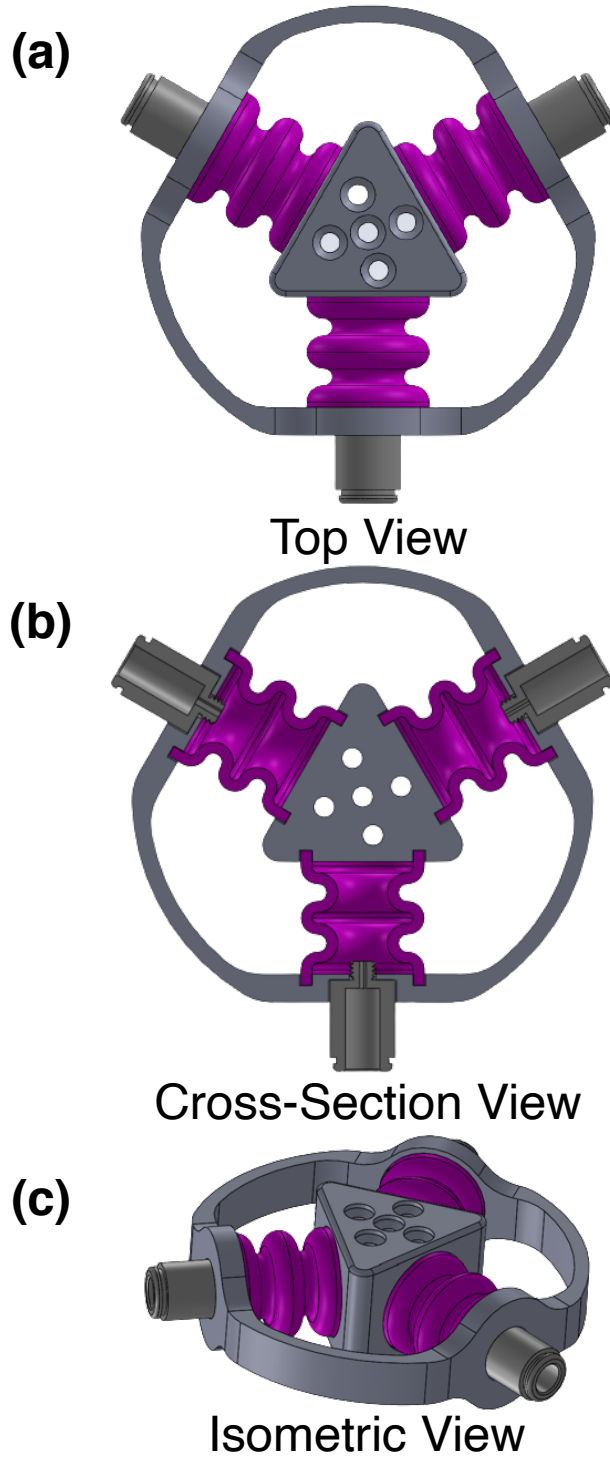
CAD model of the assembled delta mechanism. (a) Top view of the mechanism, (b) Cross-section view of the mechanism showing the different mating strategies adopted, and (c) Isometric view of the mechanism.
